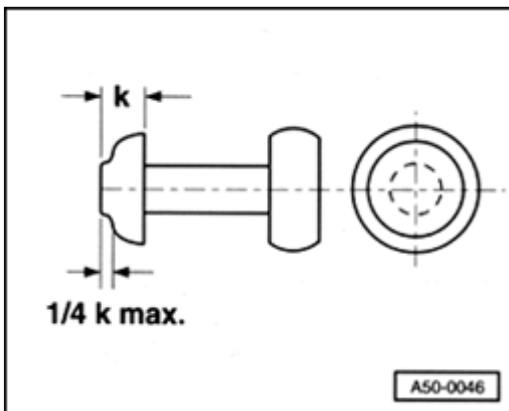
Identifying Rings Form When Riveting Die Too Small
